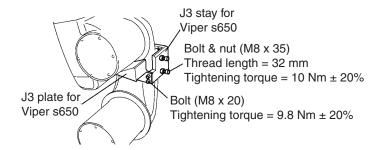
Joint 3 Hardstop Installation on Viper s650 (1)
